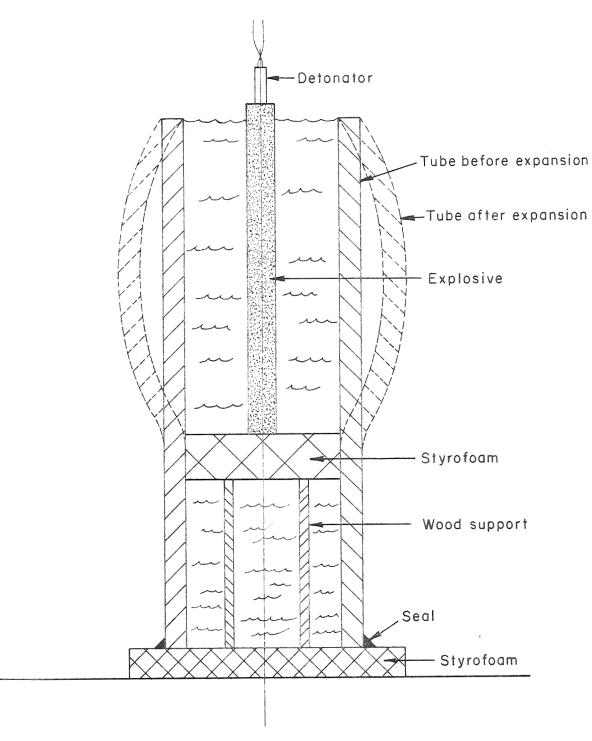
SETUP FOR EXPLOSIVE FREE FORMING OF TUBES
